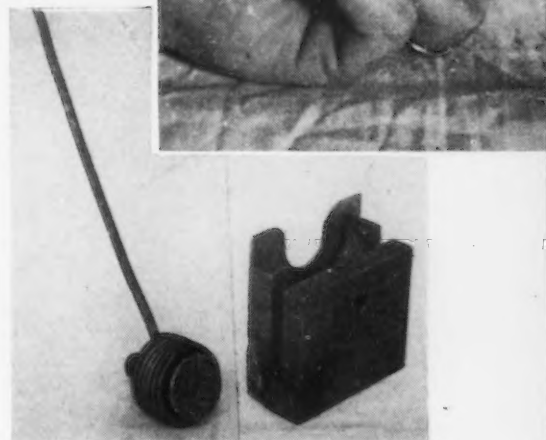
(at top)—Probably the world's smallest arc welded part—a worm gear and spindles of a thermostat weighing only 1/10 oz. Fig. 2—World's smallest arc welded jig used in assembly of thermostat parts at Robertshaw Thermostat Co.
